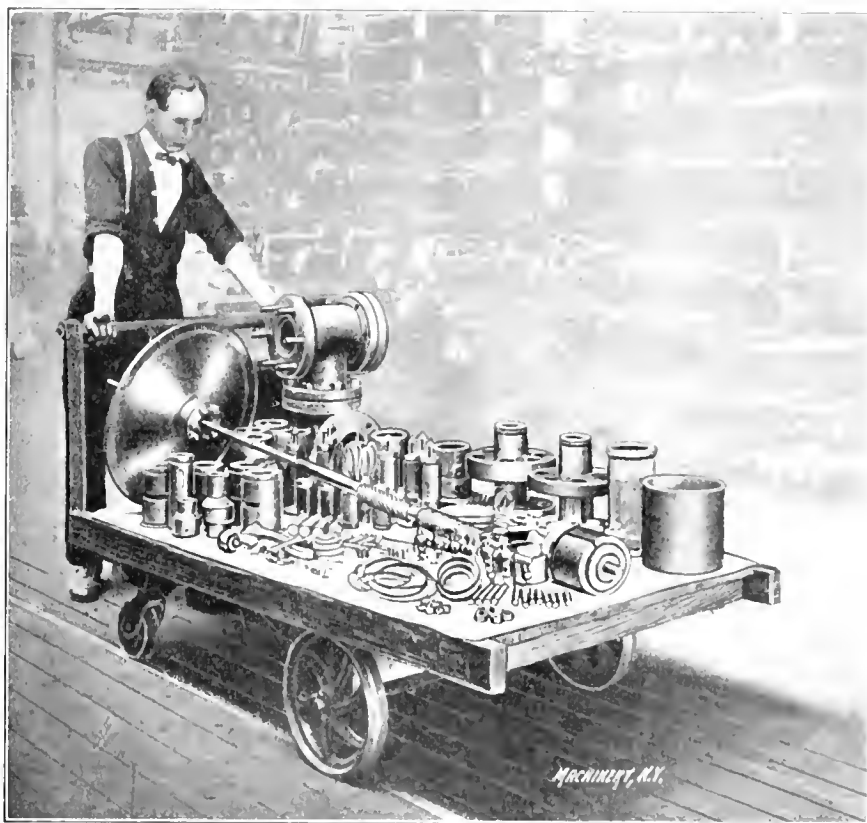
The Small Parts of a 300 H. P. De Laval Turbine as taken from the Stock Room ready for Assembling.
